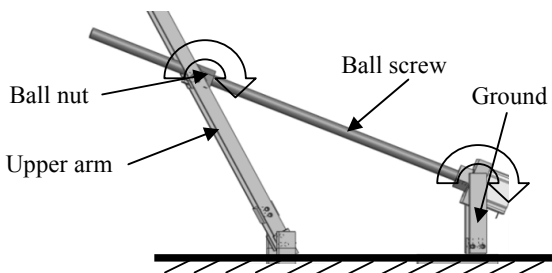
Hydraulic cylinder actuation in heavy machinery inspired drive mechanism
